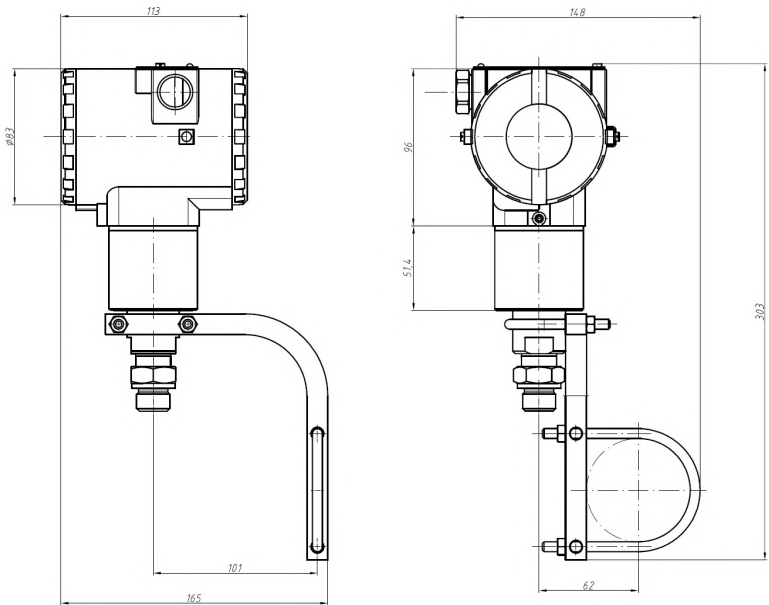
Mounting AMZ 5450 to a 2" pipe, angle bracket
